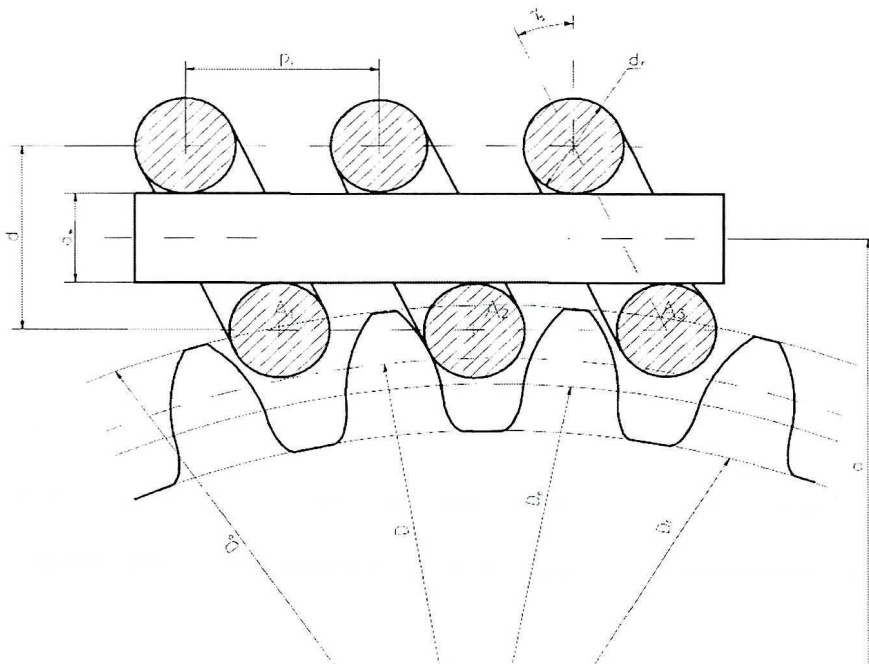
Simplified type of worm gear whose worm has the thread made of wire
